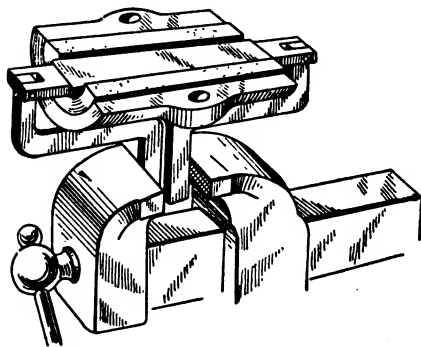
Holding Fixture for Crankshaft Bearing Caps
